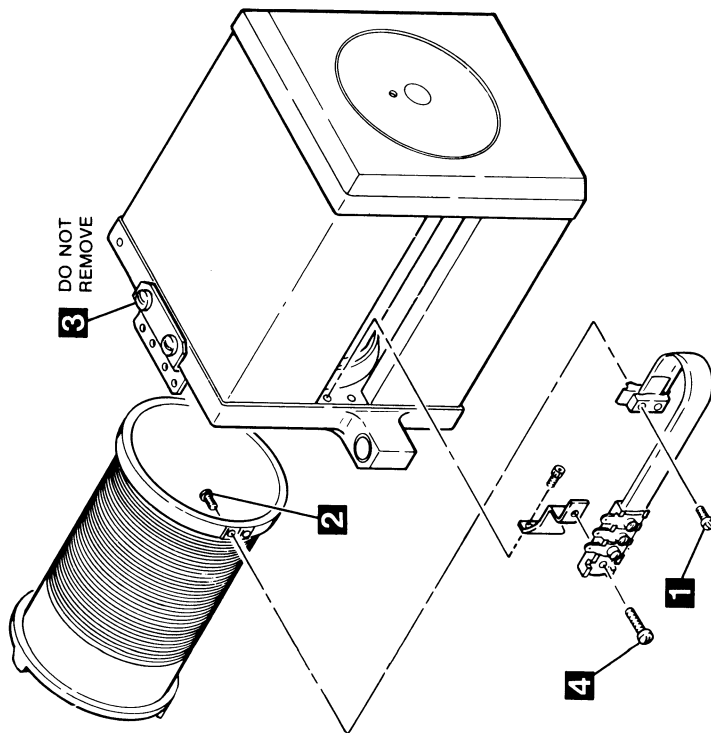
BOBBIN AND LINEAR MOTOR
